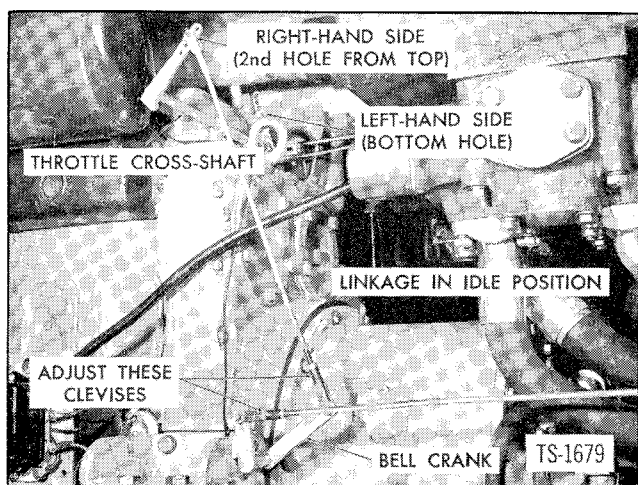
Throttle Linkage and Cross-Shaft (G.M. Diesel)
